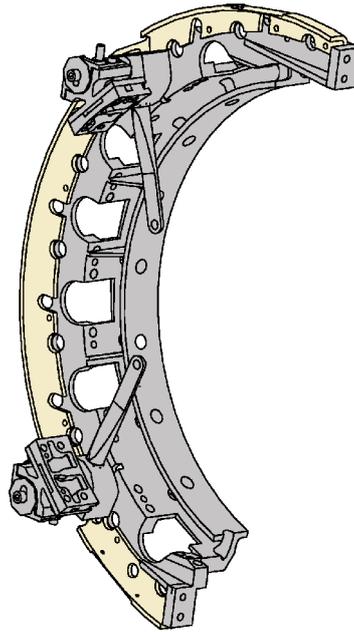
A half clamshell support structure equipped with two brackets and an epoxy half ring for the external shield
